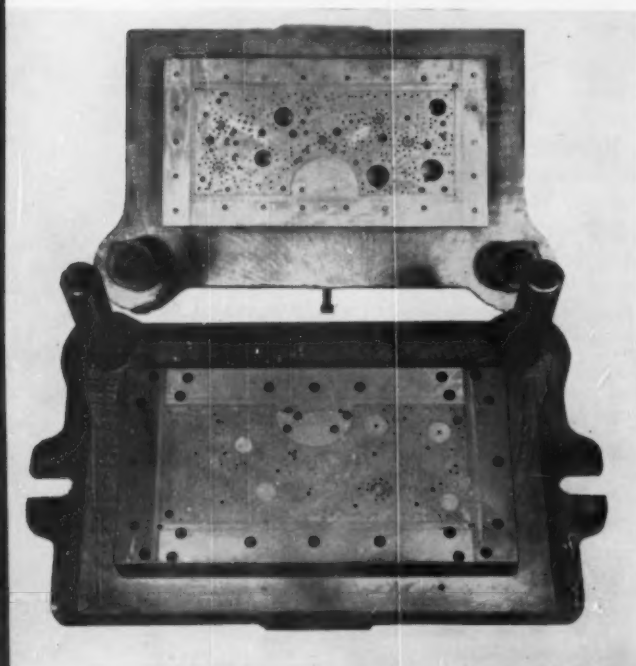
Complex pierce die for printed circuit boards. Made of air-hardening steel, this die produces 30,000 parts before resharpening is necessary.
